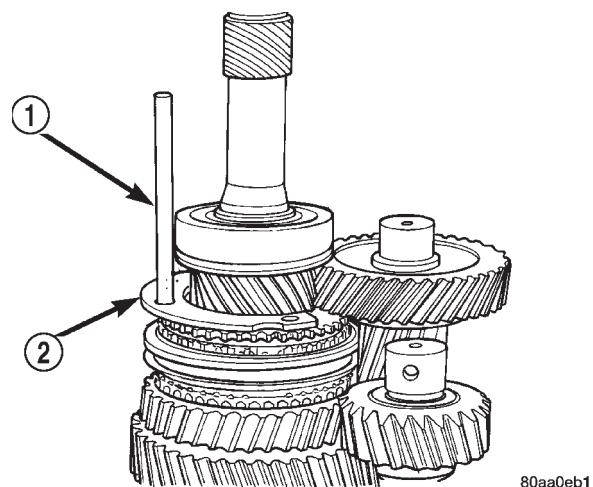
Positioning Output Shaft Bearing Retainer For Rear Housing Installation
